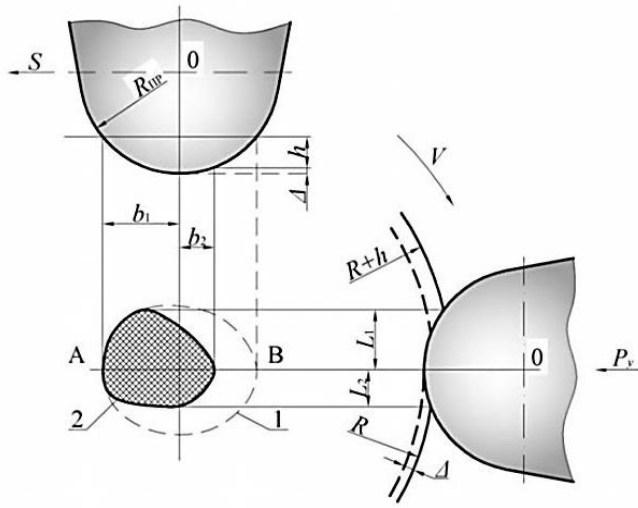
Shape of the contact surface in the smoothing processing cylindrical parts with spherical indenter working part
